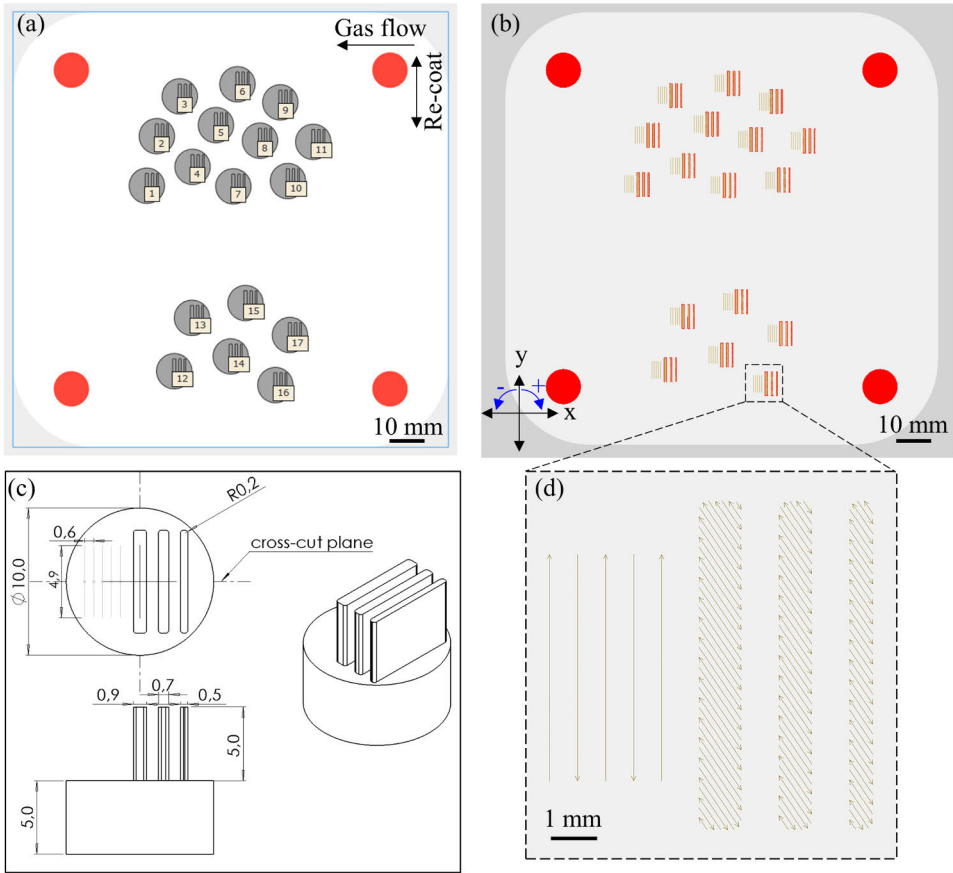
Build layout in Publication IV: (a) specimen placement on the building platform, (b) placement of the single tracks on layer number 168, (c) specimen geometry and main dimensions, and (d) detailed view of the single tracks and the scanning strategy used with only the core vectors.
